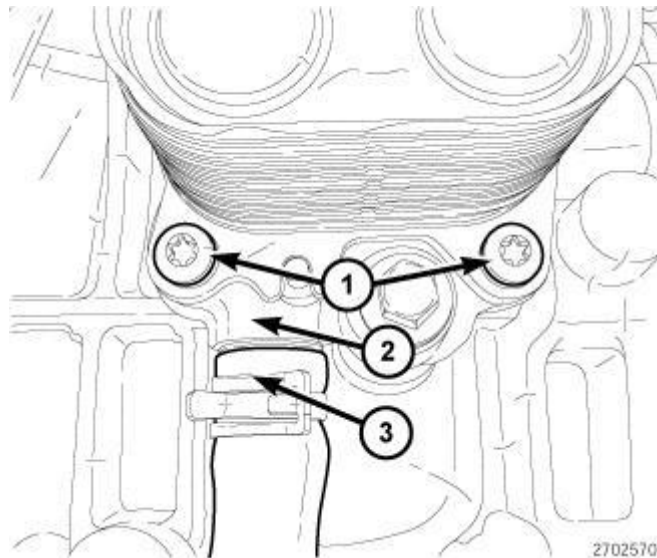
Coolant Hose, Oil Cooler Housing & Bolts
